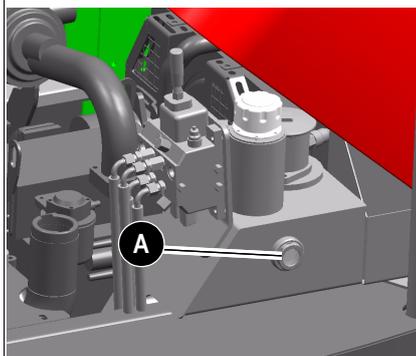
Oil level indicator on the hydraulic oil tank 2001
